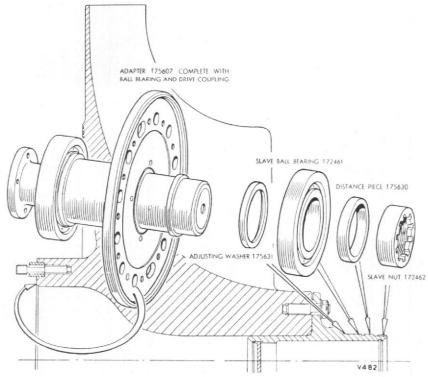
Preparing impeller for balancing in Avery type 7208 machine.
